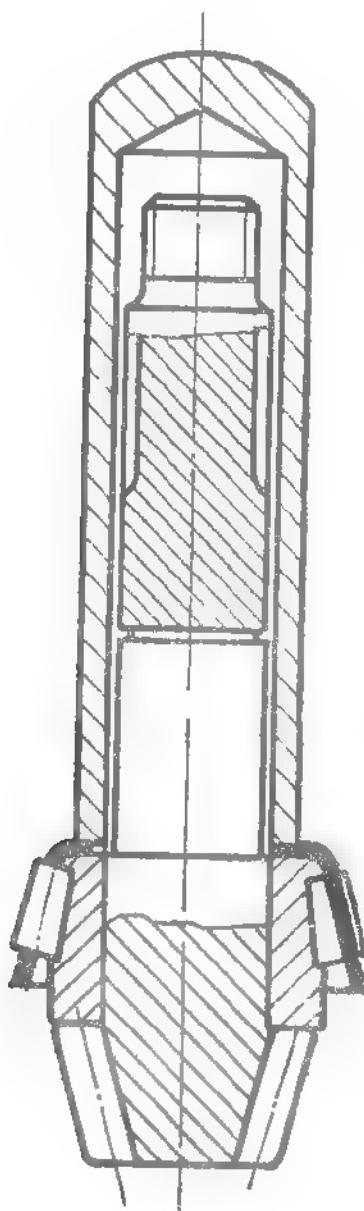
119. PRESSING DIFFERENTIAL CASE BEARING INNER RACE
